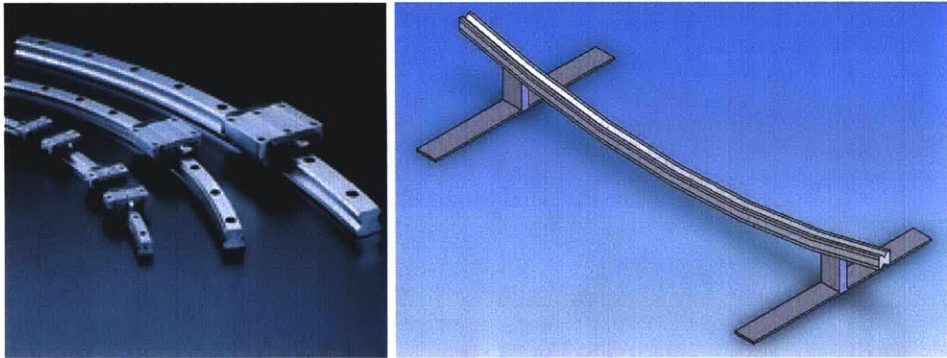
THK R-Guide Type HCR Curved Bearing Rail and Curved Bearing Rail Base
